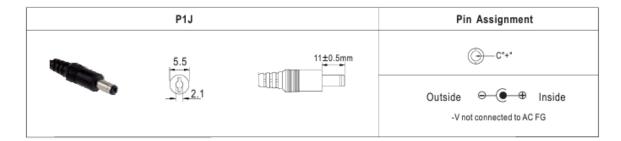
Requirements for plugs fitting the EXT PWR socket of the TBT2PCIe enclosure.
